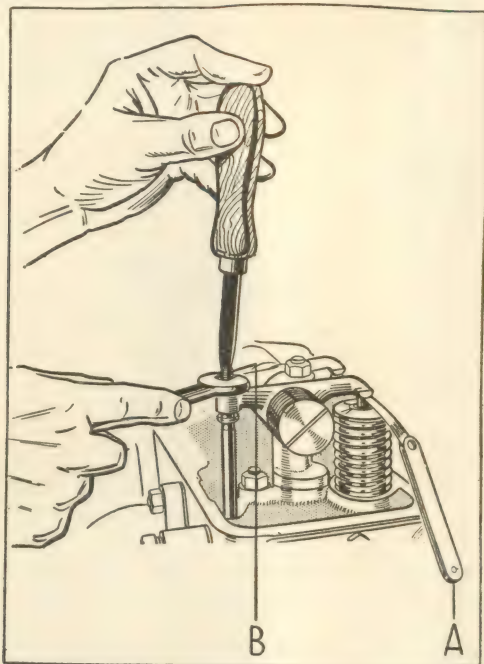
ADJUSTING OVERHEAD VALVE CLEARANCES
